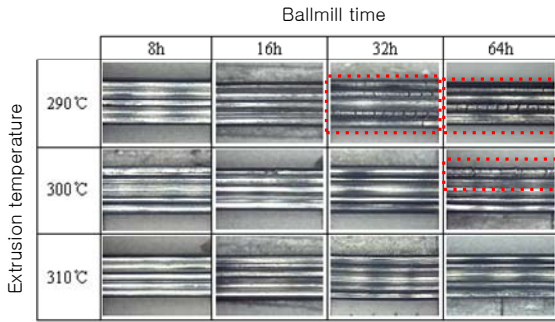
Surfaces of the spur gear extruded according to ballmill time and extrusion temperature
